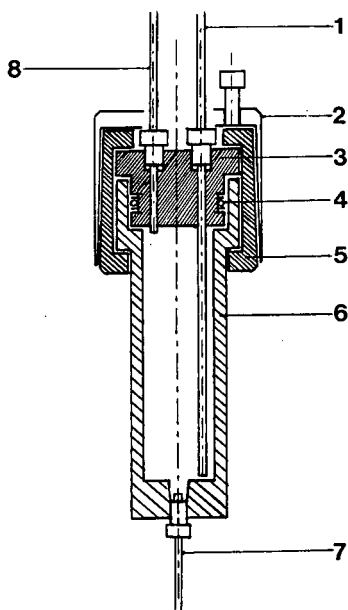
Collection device. 1 = Tubing of 1/8 in. O.D. connected to the extractor; 2 = lid; 3 = vessel head; 4 = anti-extrusion O-rings; 5 = half-circle nuts; 6 = body of the collector; 7 = tubing of 1/8 in. O.D. connected to the collection valve; 8 = outlet port.
